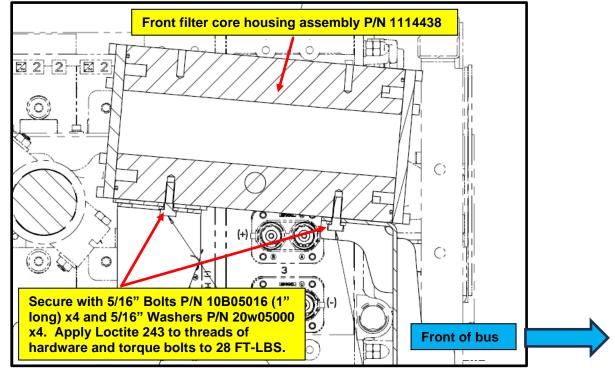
CS view inside forward inverter rack - Install front ferrite core enclosure assembly
